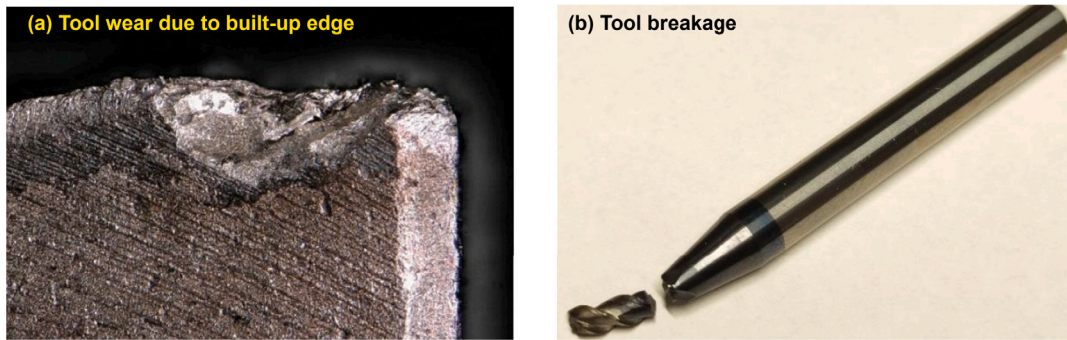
Tool wear due to built-up edge and Sudden failure of tool during experiments.
